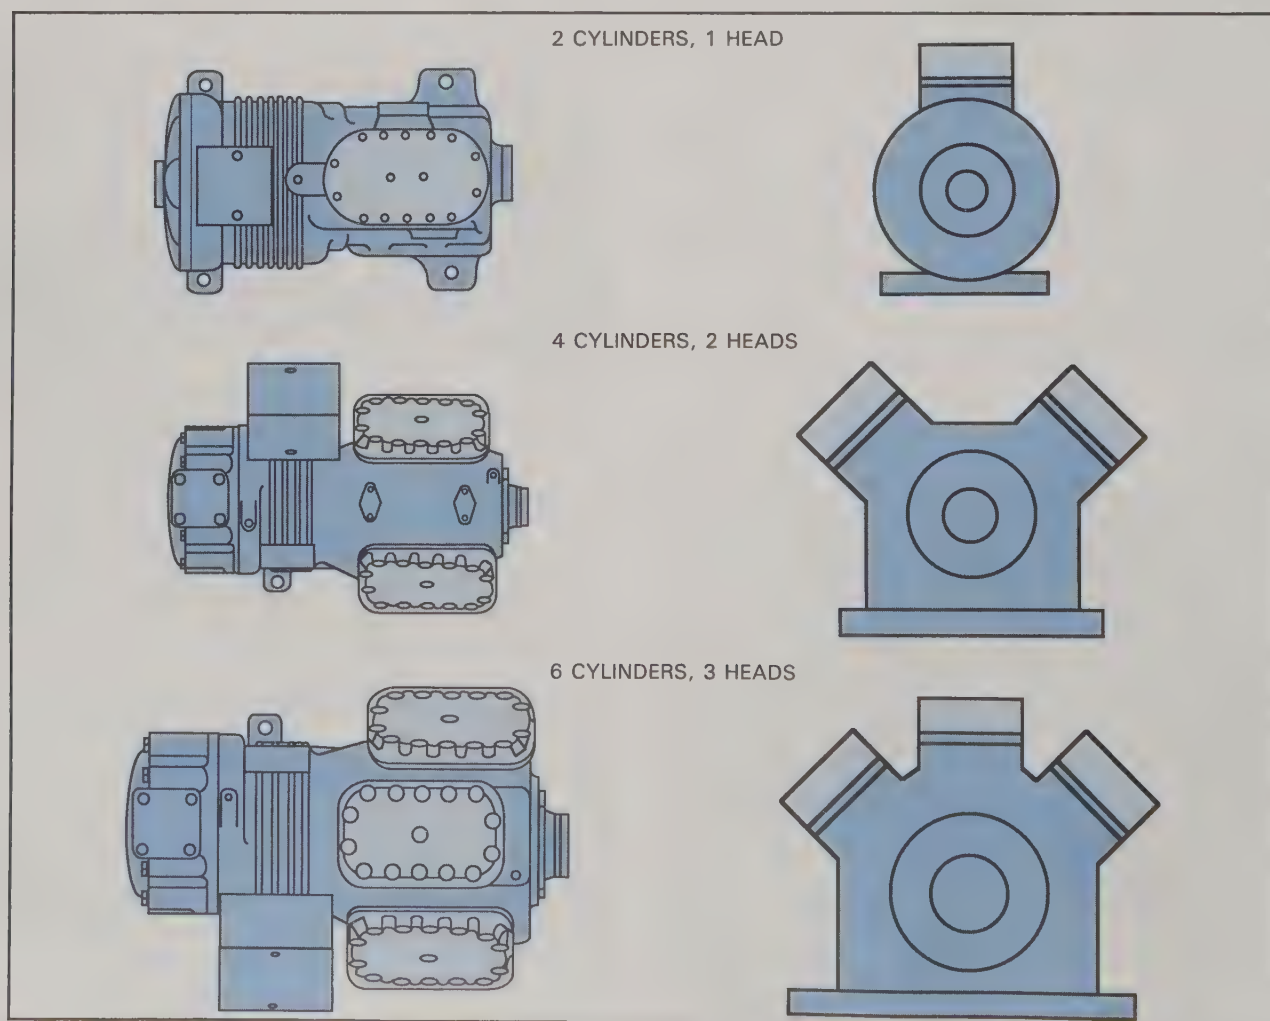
Typical cylinder head arrangements for semi-hermetic compressors are shown in top and end views. Cylinders are usually grouped two per head. (Copeland Corp.)
